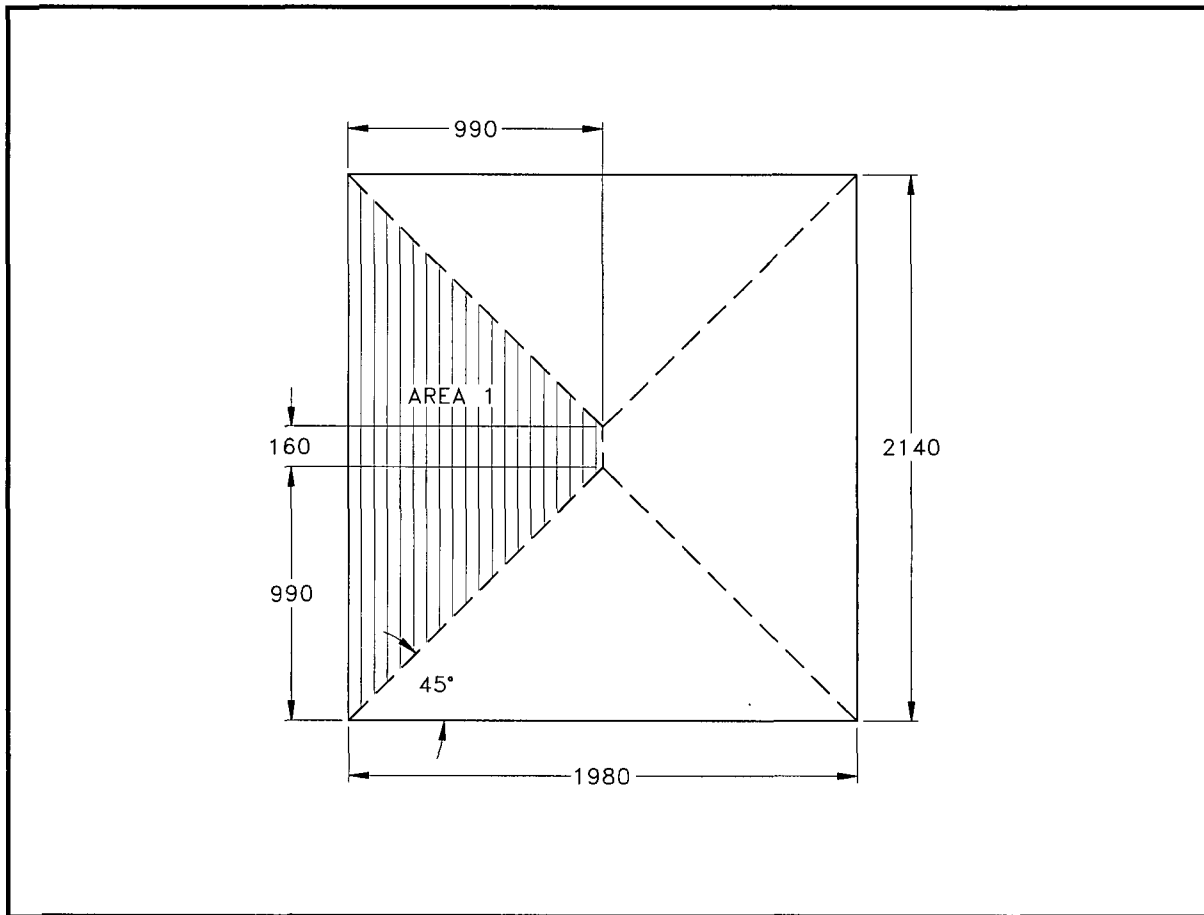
View of Area 1 on End Sheet Used to Calculate End Edge Load on Sidewall
